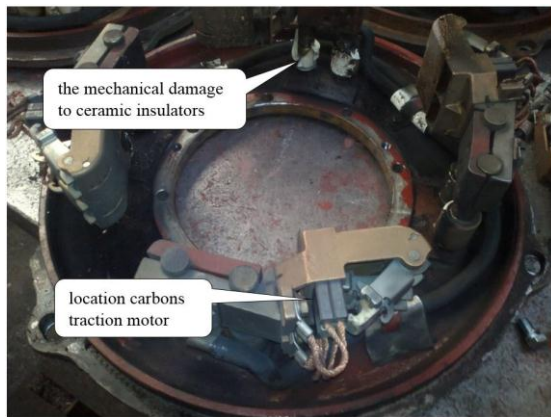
Brush rigging of the traction motor (mechanical damage of ceramic insulators)
